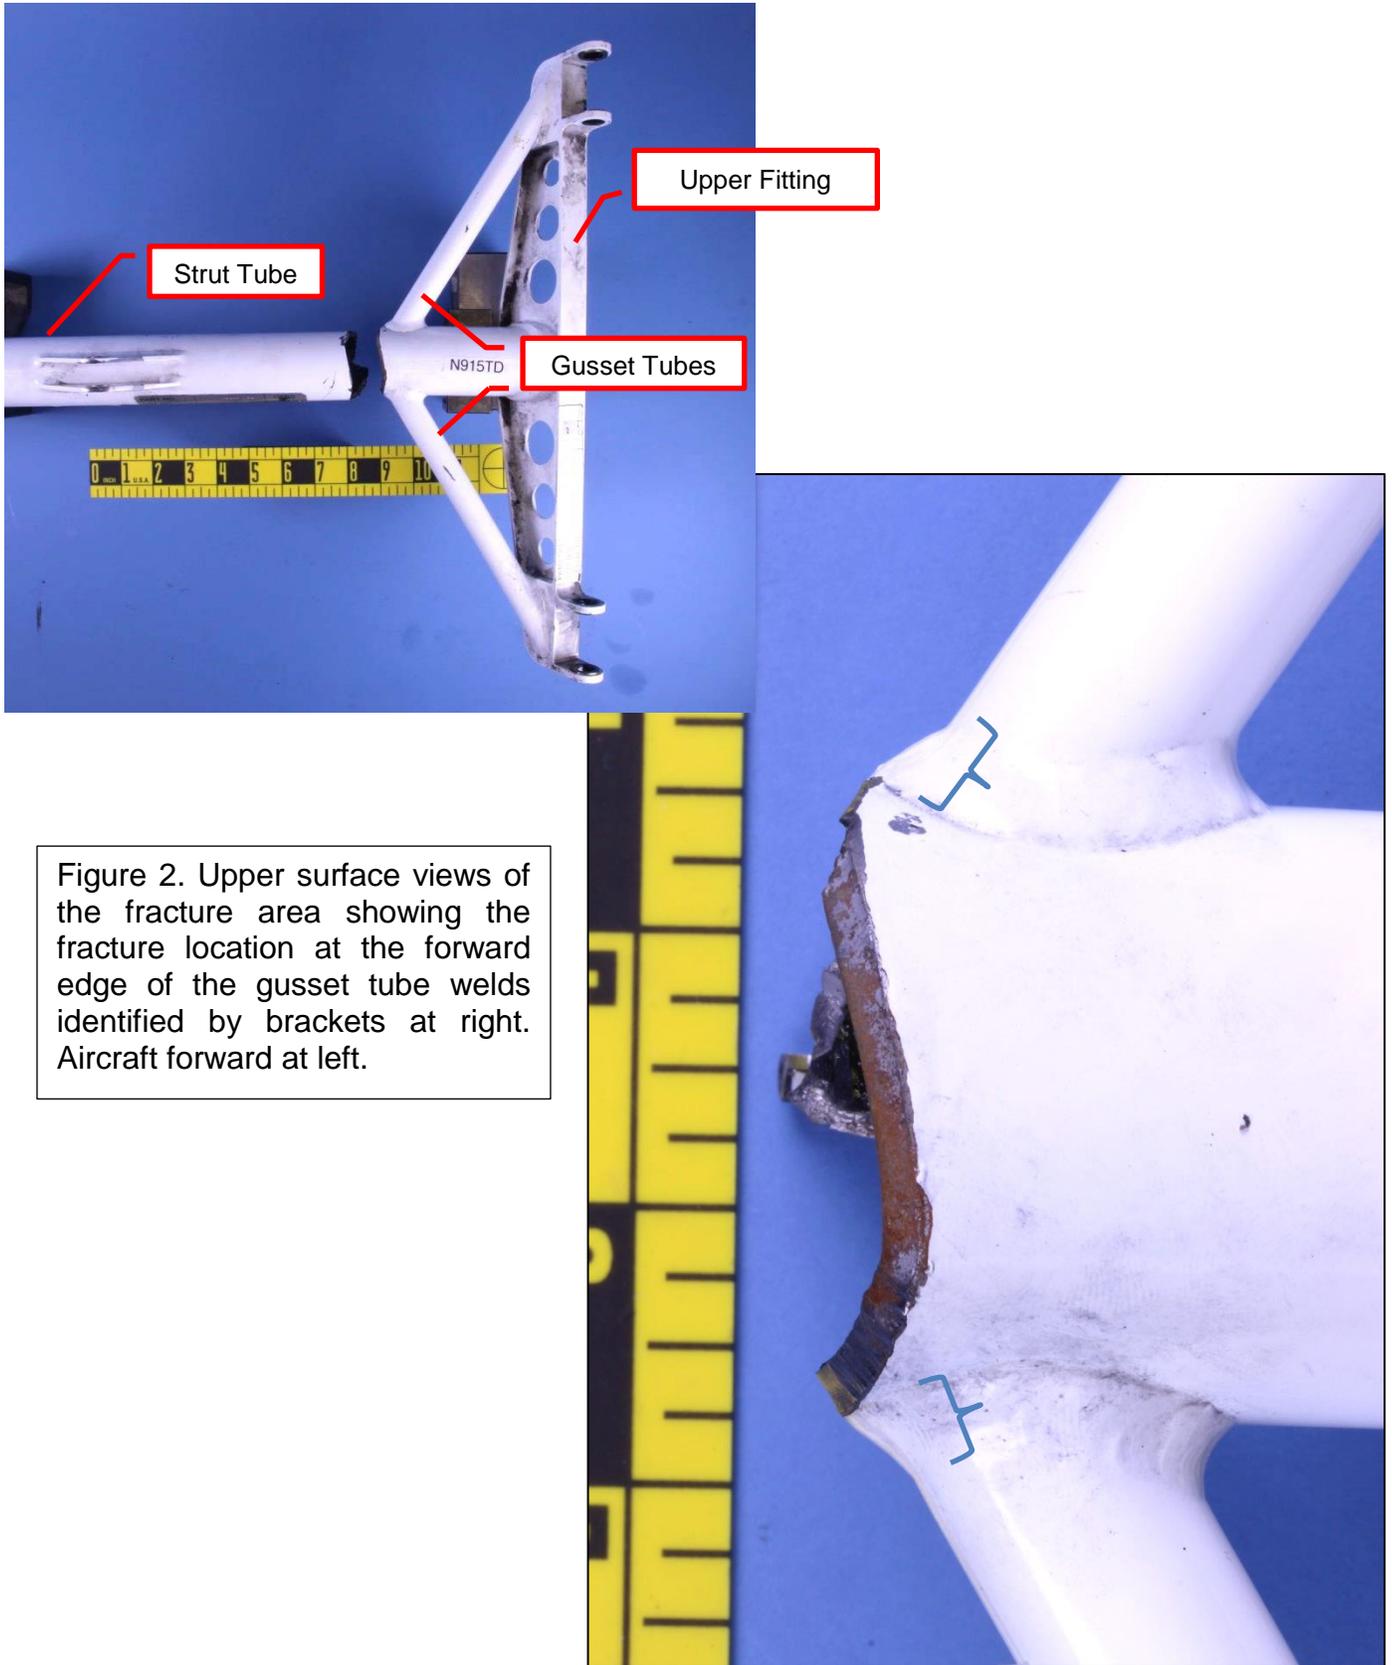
Upper surface views of the fracture area showing the fracture location at the forward edge of the gusset tube welds identified by brackets at right. Aircraft forward at left.
